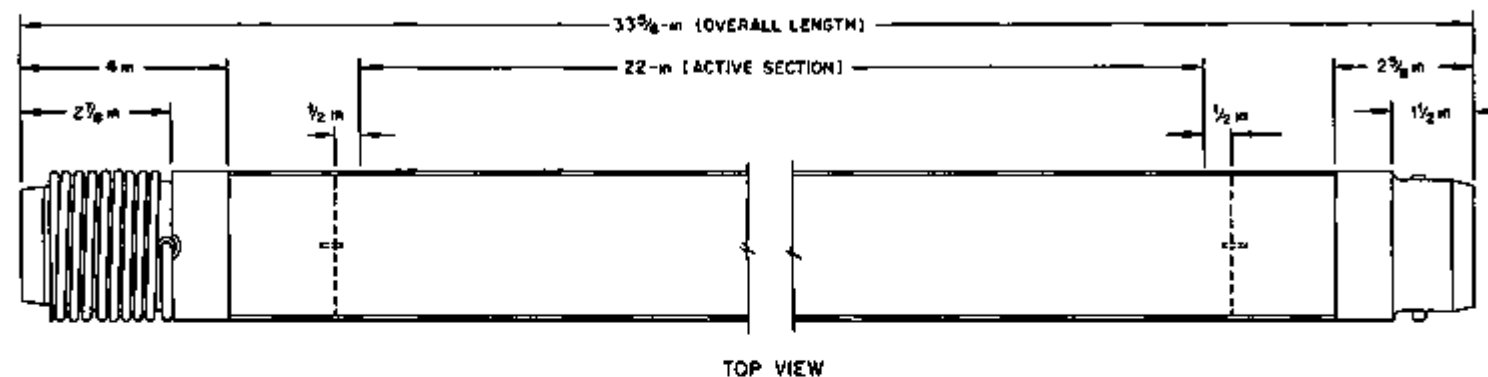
Dimensional Drawing of APPR Fuel Element.
